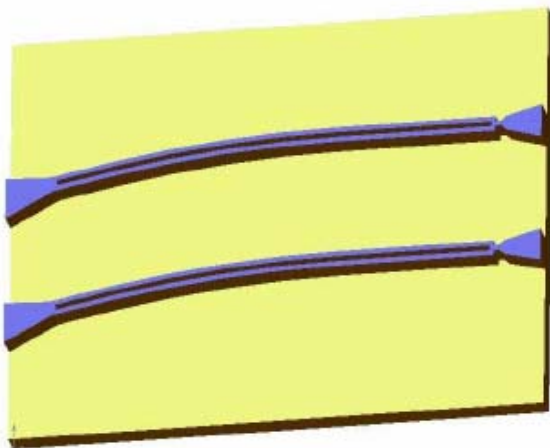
Layout of a brass tool used for hot embossing of waveguides.
